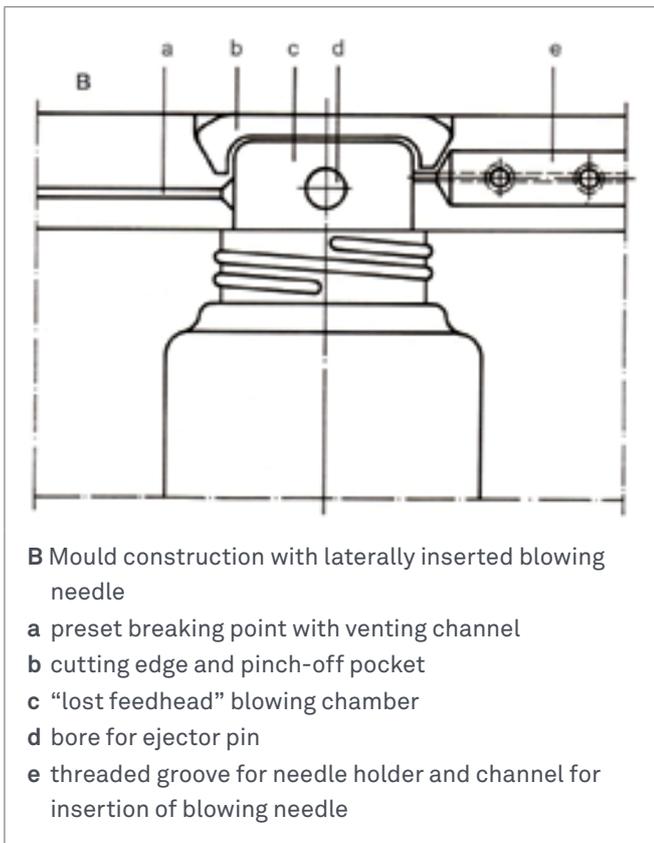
Mould Design with “Lost Feedhead” Blowing Chamber for Wide-necked Containers
